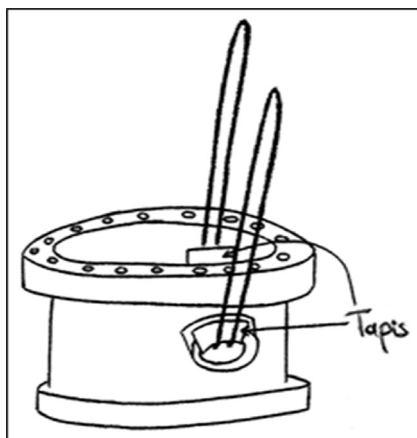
Placing slings on a cylinder pipe section to hoist it (drawing made during fieldwork).
